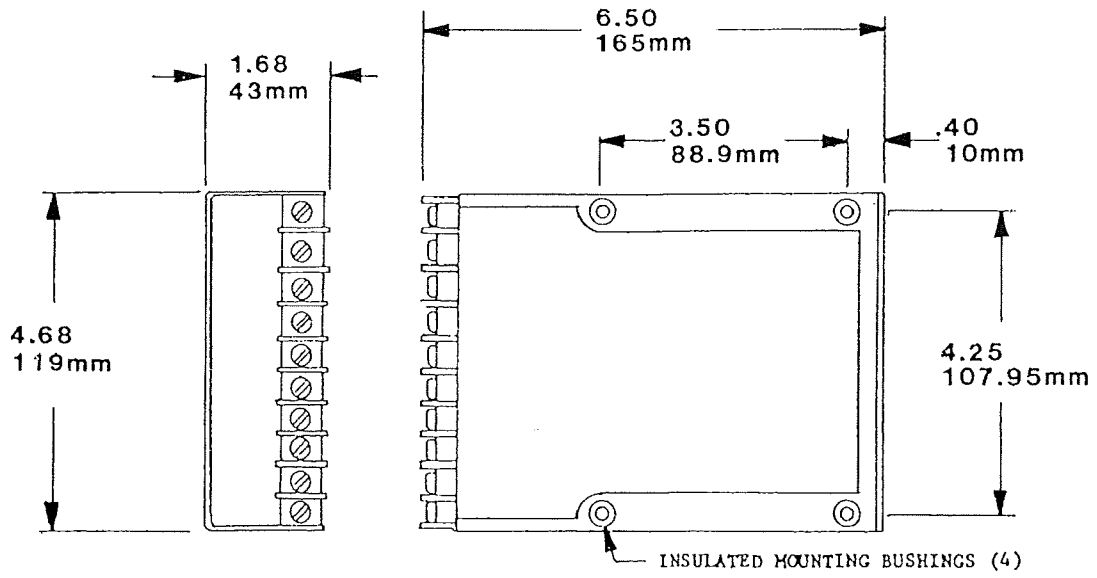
OUTLINE DIMENSIONS-TRANSMITTER CASE
